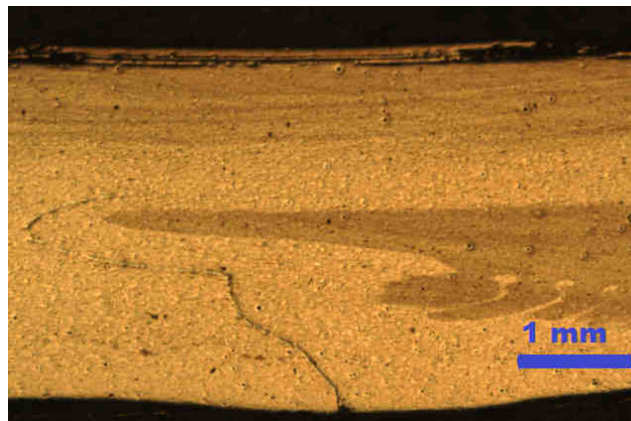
Micrograph of 3mm thick butt weld showing a root defect due to backing bar deformation.
